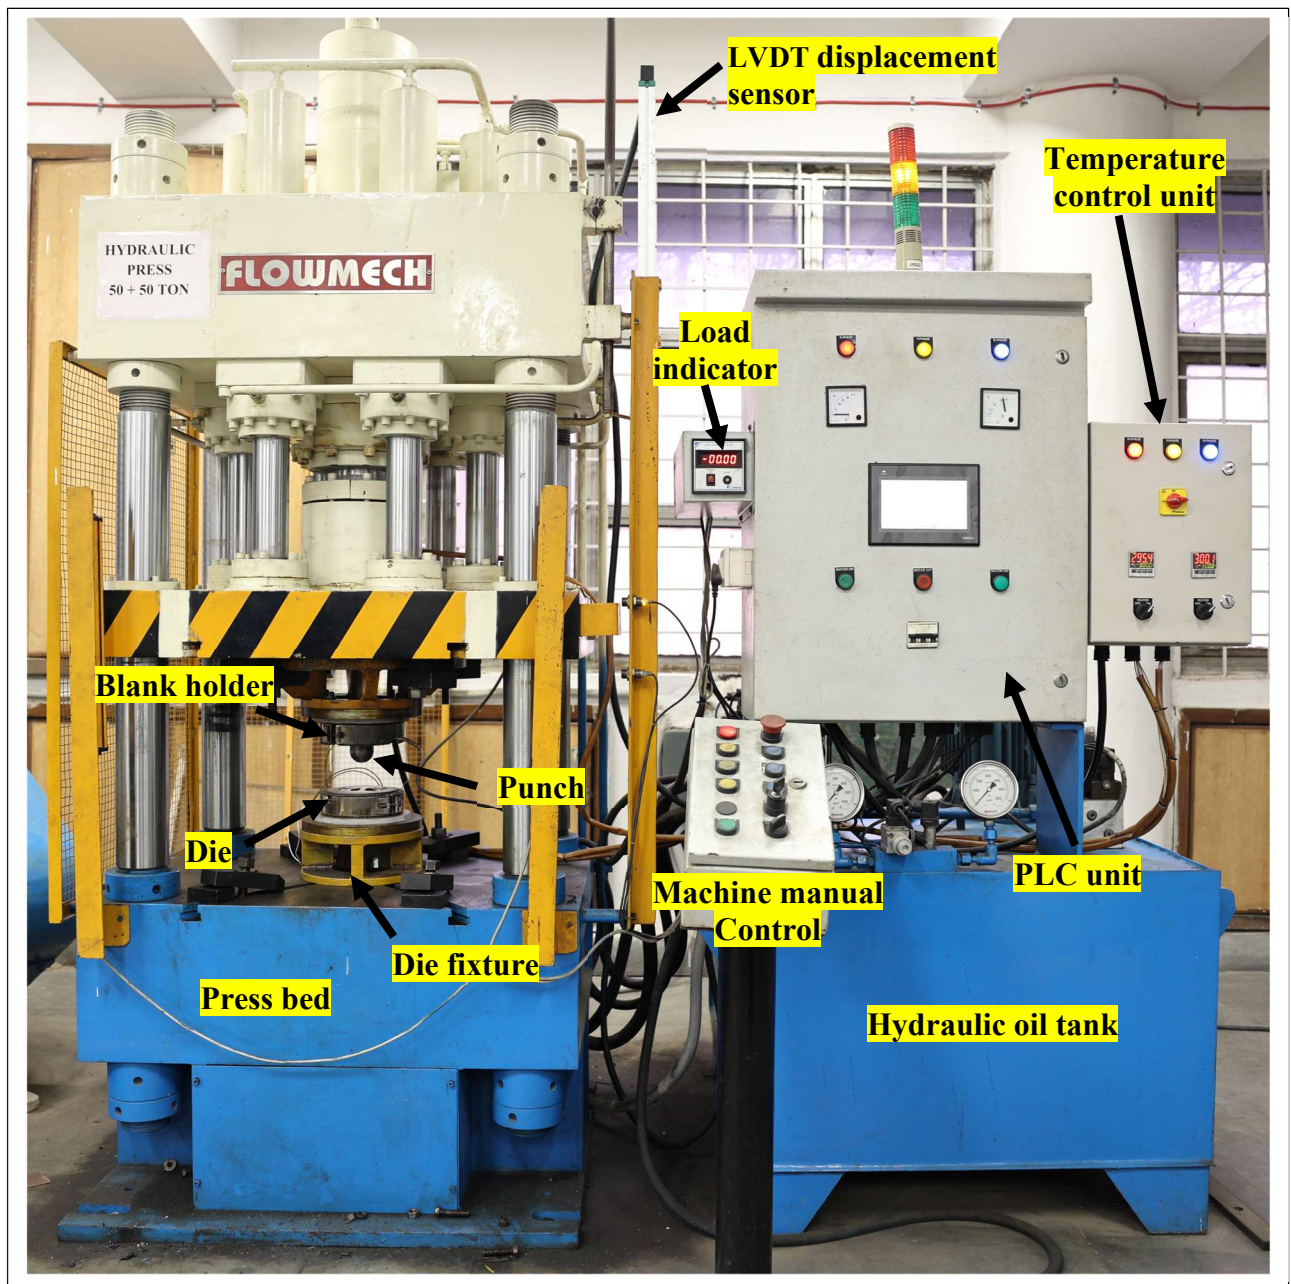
Experimental setup showing assembly of fabricated tools integrated with 100 tonne capacity hydraulic press
